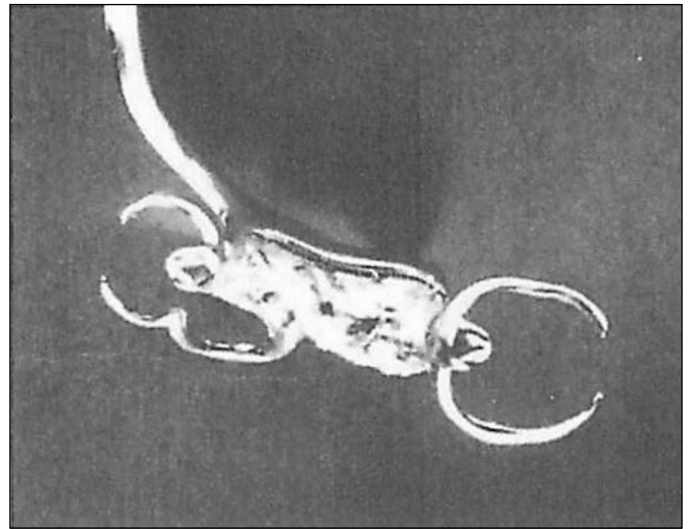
Gold alloy dental casting showing clasps requiring high dimensional precision.
